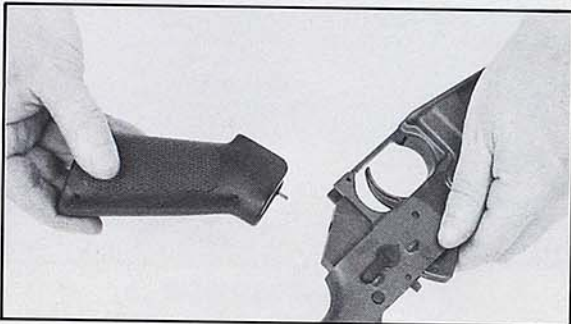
FIRE CONTROL SELECTOR DETENT DISASSEMBLY
